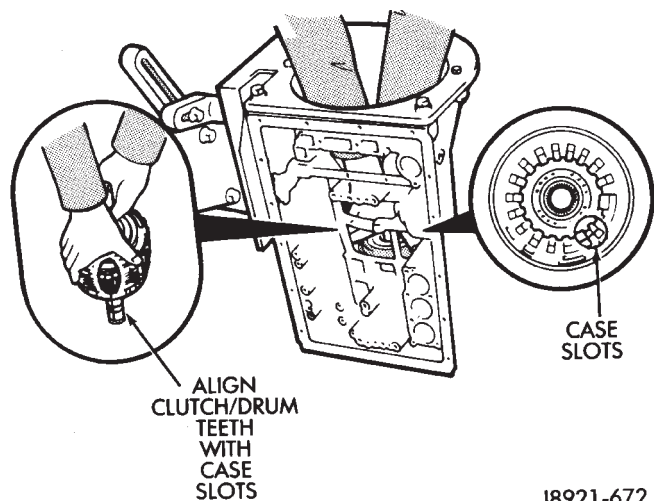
Installing Output Shaft And Rear Planetary Assembly
